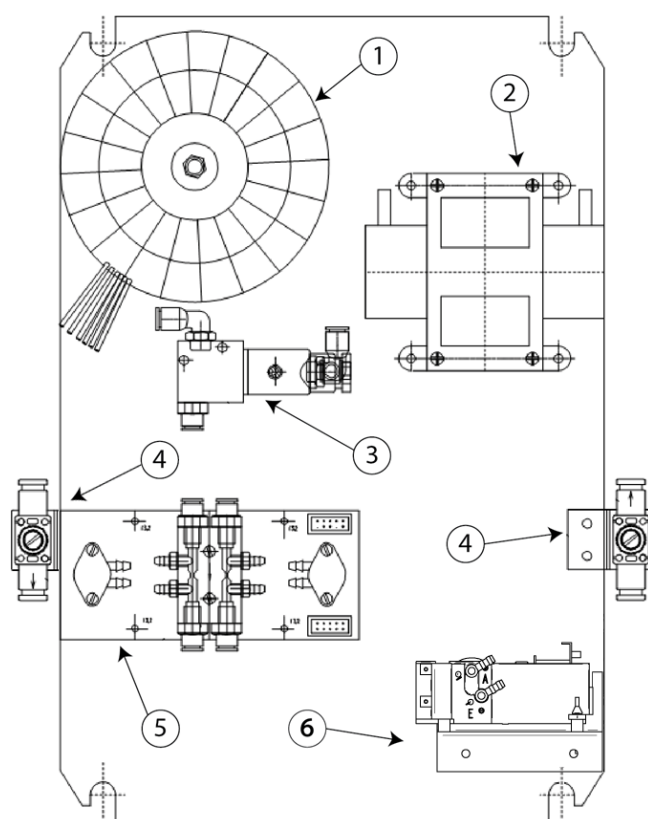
Reinforced probe inner part assembly (KES/KIS-1323)
